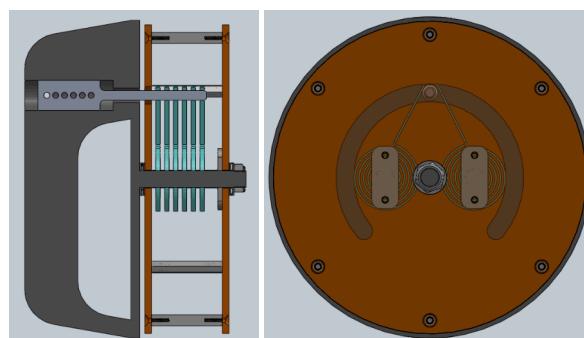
Section view of the resistance puck showing the adjustor mechanism (light gray) and back view of the adjustor mechanism and clock springs (light blue)
